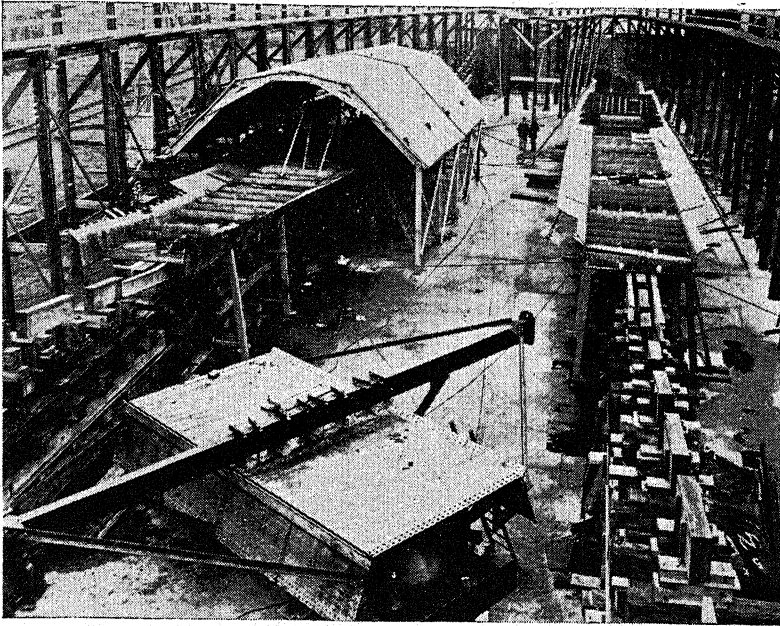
Placing shop welded sections on horizontal keel plate.
